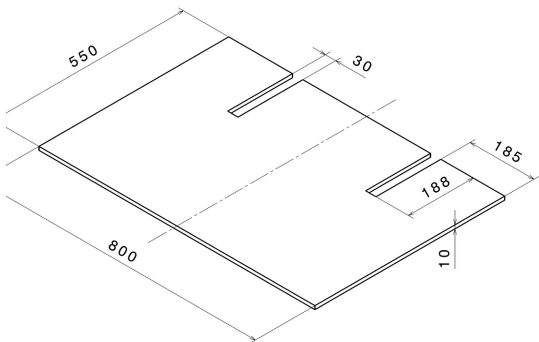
Dimensions of the seat surface of the CRS compatibility test bench
